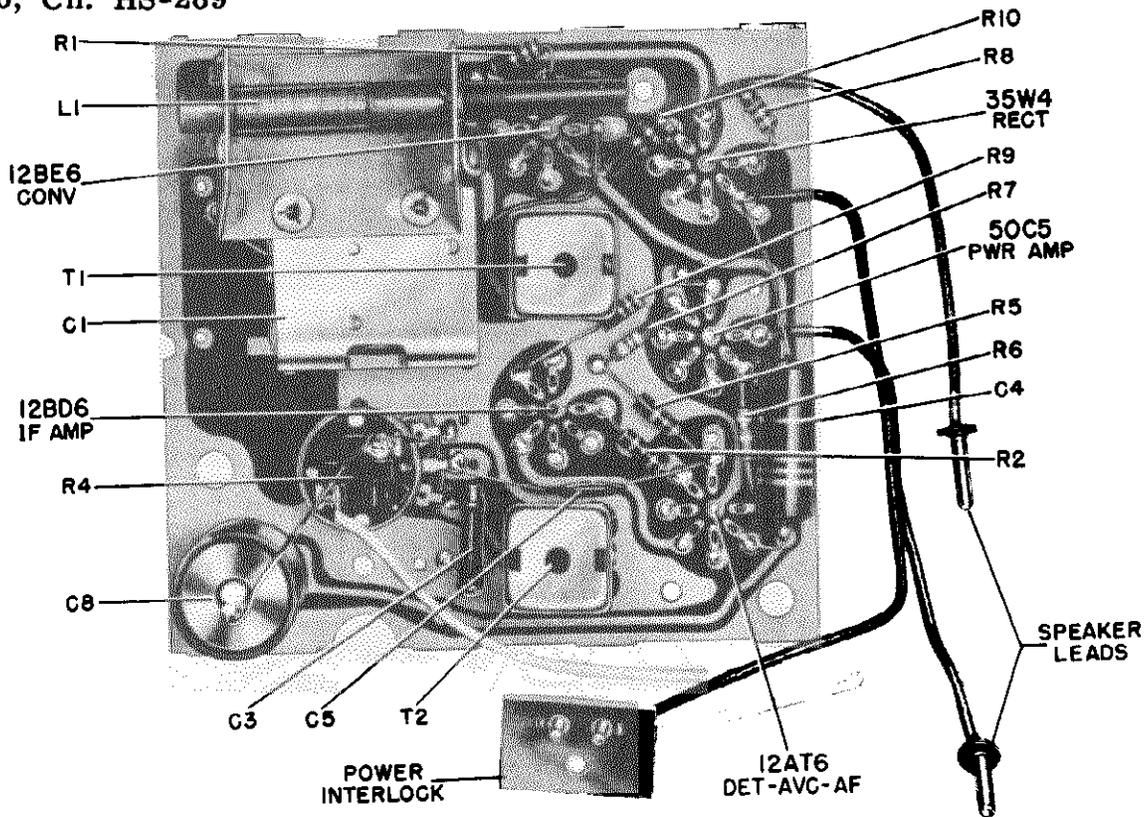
FRONT VIEW OF CHASSIS - WIRED AND BLANK (LATE MODEL)
